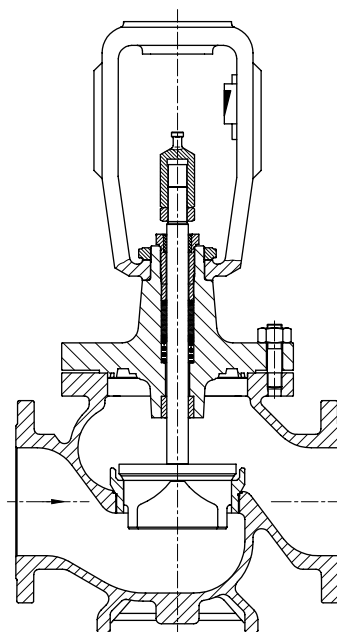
· Type 241 Globe Valve, sizes 8" to 10"
